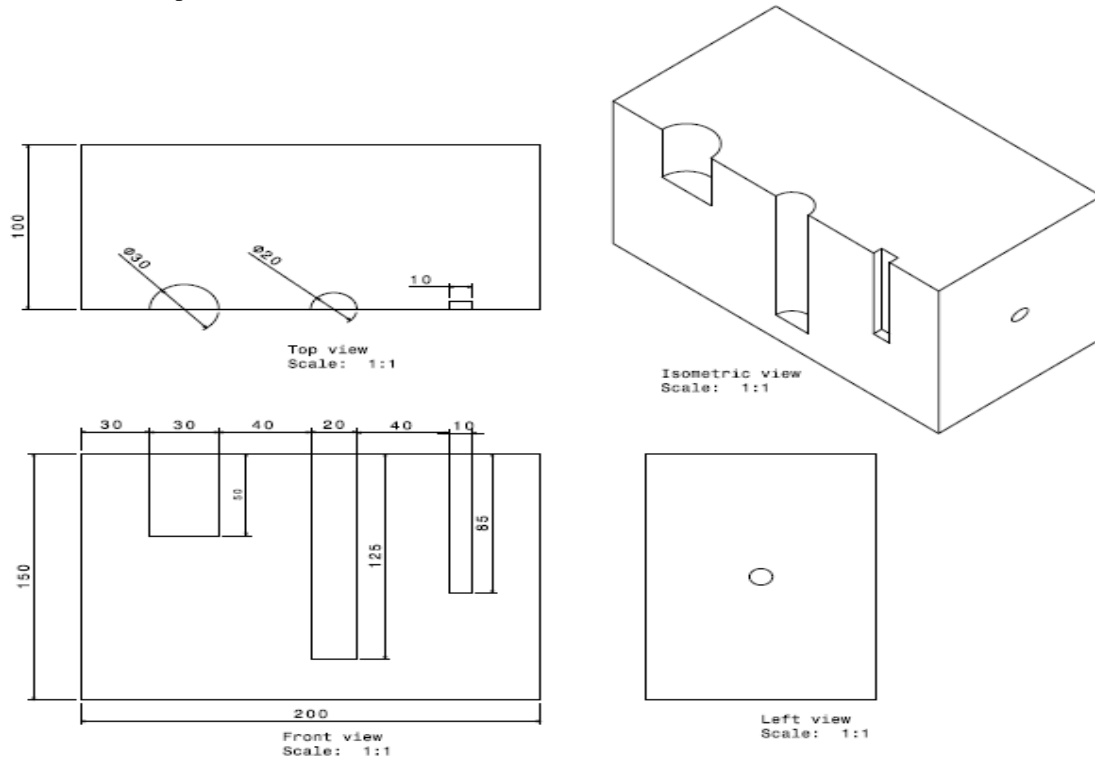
Stainless steel hollow mould used for casting with detailed dimensions
